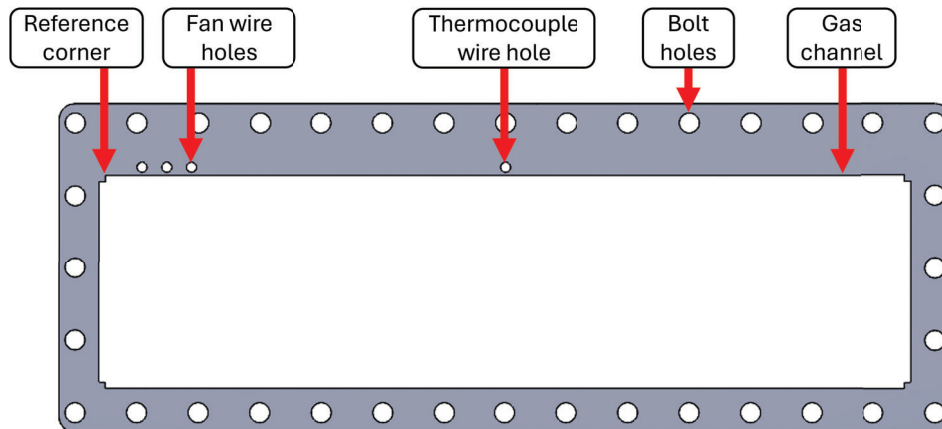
The ram's horn's exit bolt flange includes through holes for bolting, a central channel cutout for gas flow, corner features used for alignment during welding, holes for fan wire feedthroughs, and a hole for a thermocouple for measuring the gas flow temperature.
